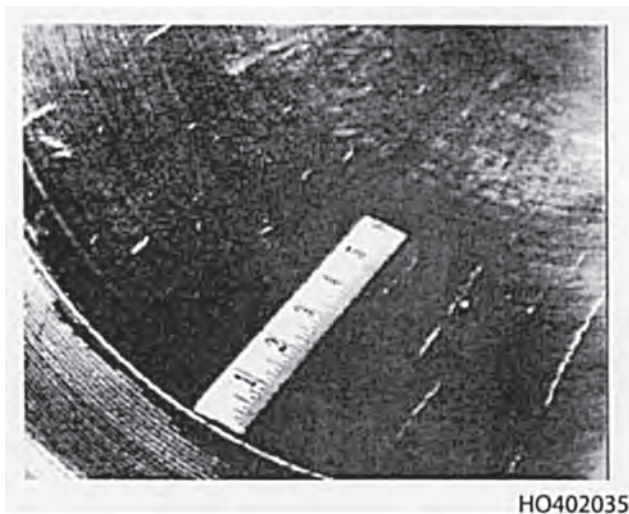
Magnetic Particle Indications of Flakes in a Bore of a Large Hollow Shaft
